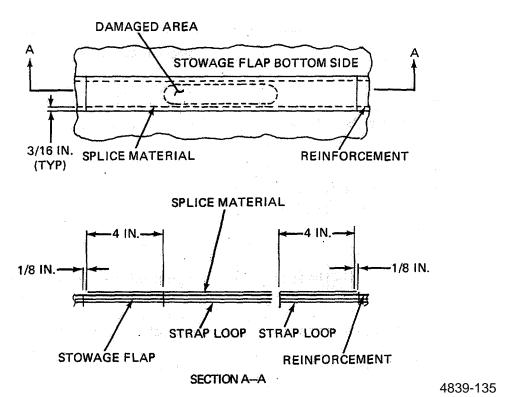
Suspension Line Retaining Strap Reinforcement Splicing Details .
